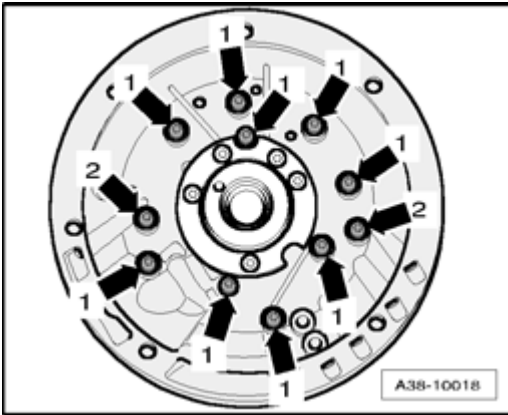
ATF Pump To ATF Supply Housing Bolts
